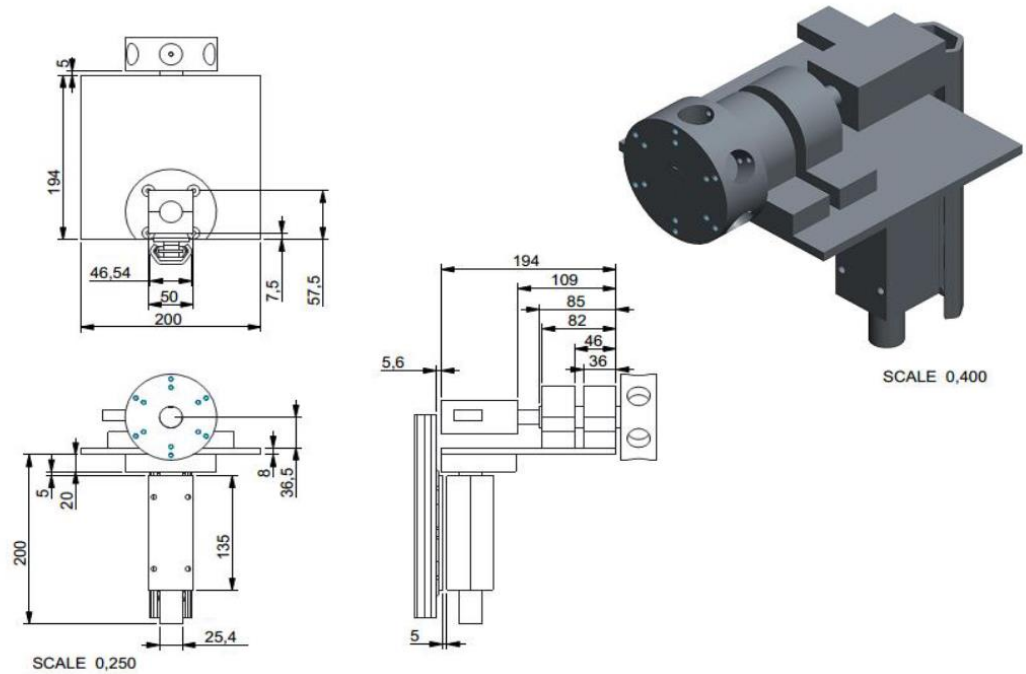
CAD drawings of the designed tri-pendulum without the arms. The mounting plate, ball bearings, encoder and the hub are assembled.
